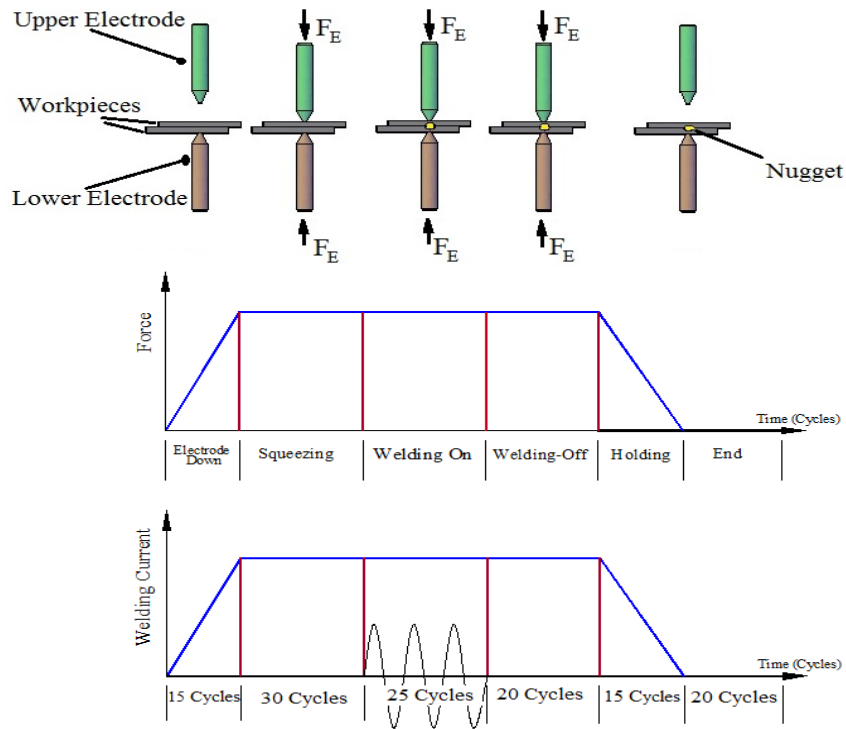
Resistance spot welding processing weld time parameters.
